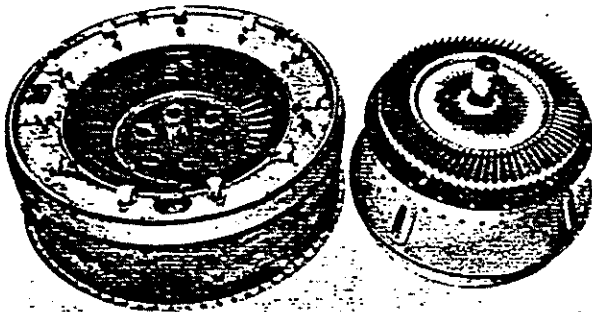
Exhaust Diffuser and Combustion Chamber Separated
